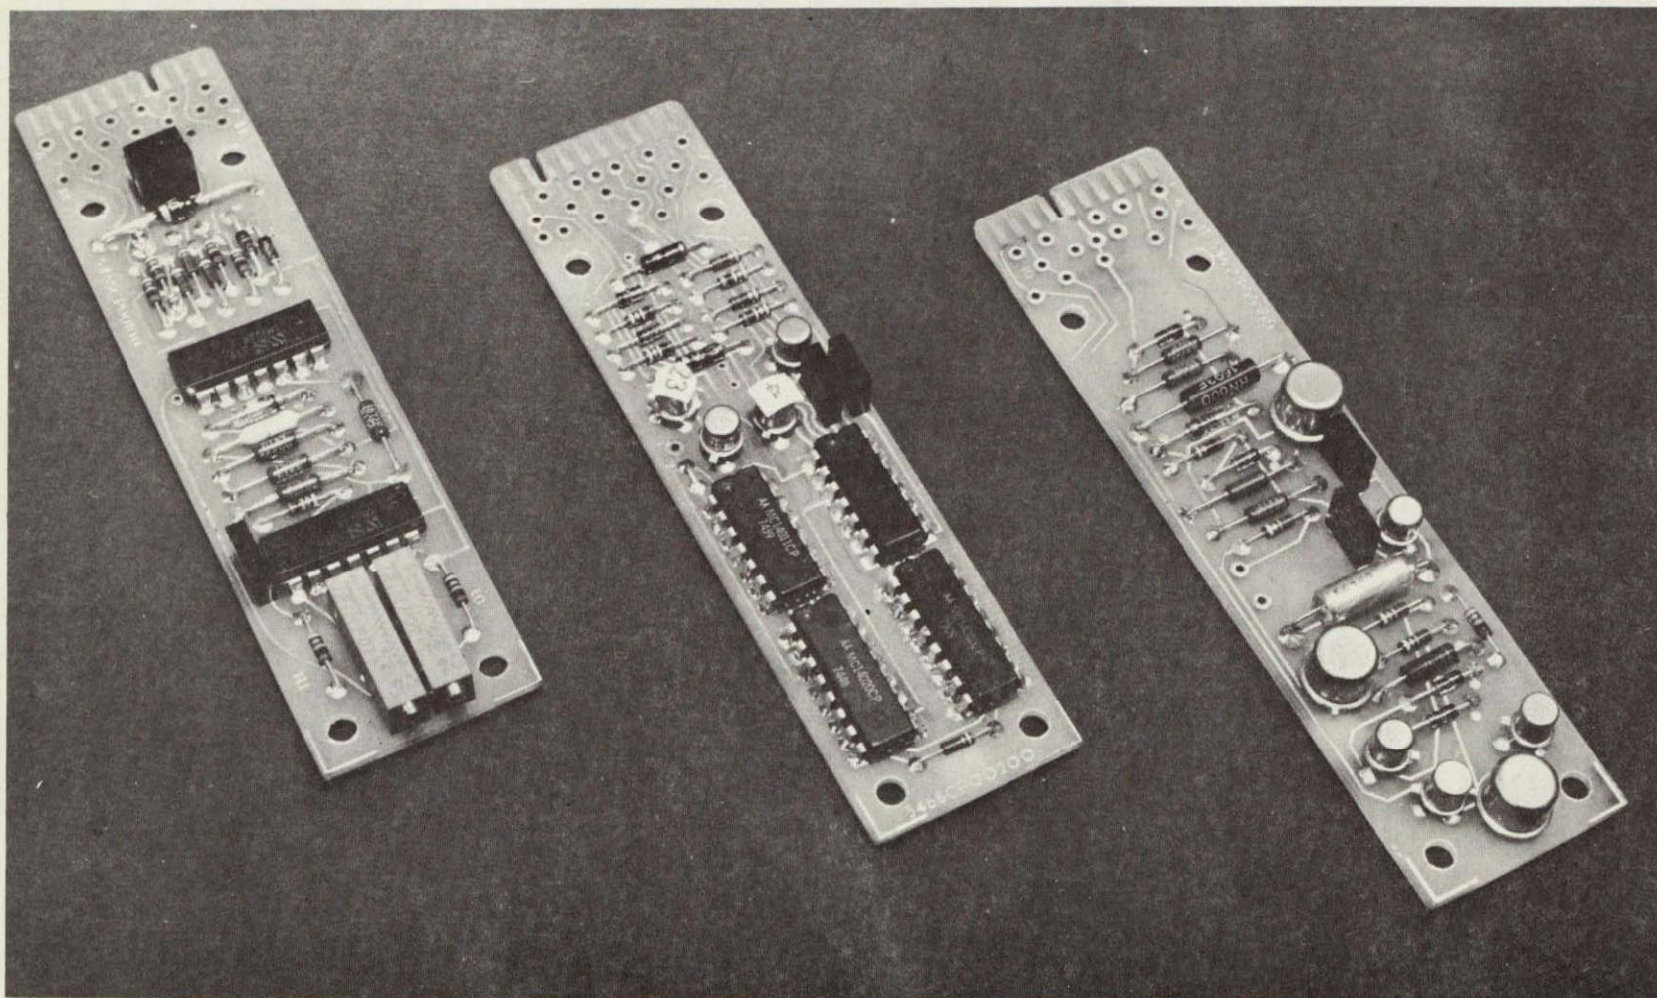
THREE DOUBLE-SIDED PC BOARDS USED IN SCP
